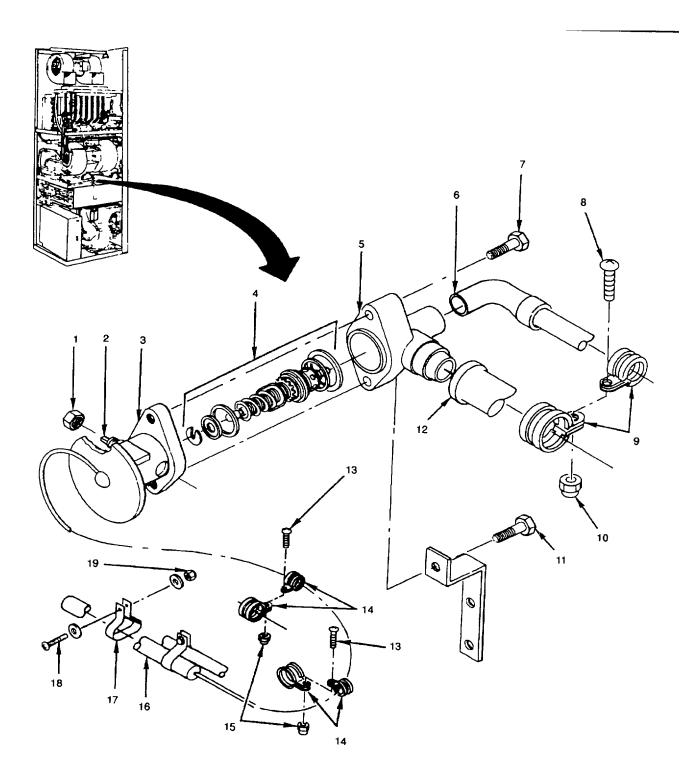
Expansion Valve (V6) (Liquid Quench) 5-70
